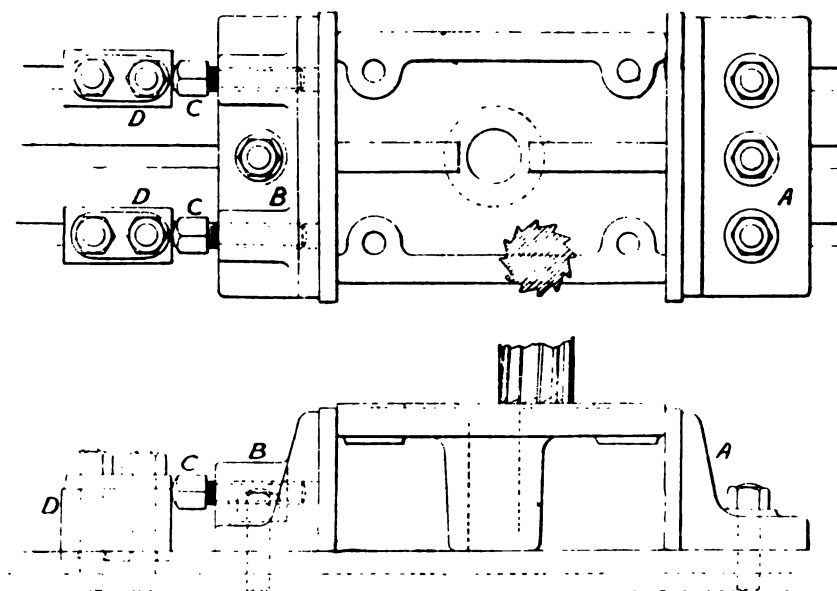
End Mill facing a Boss Bearing pinched between Special Clamps, with Stop Blocks.
